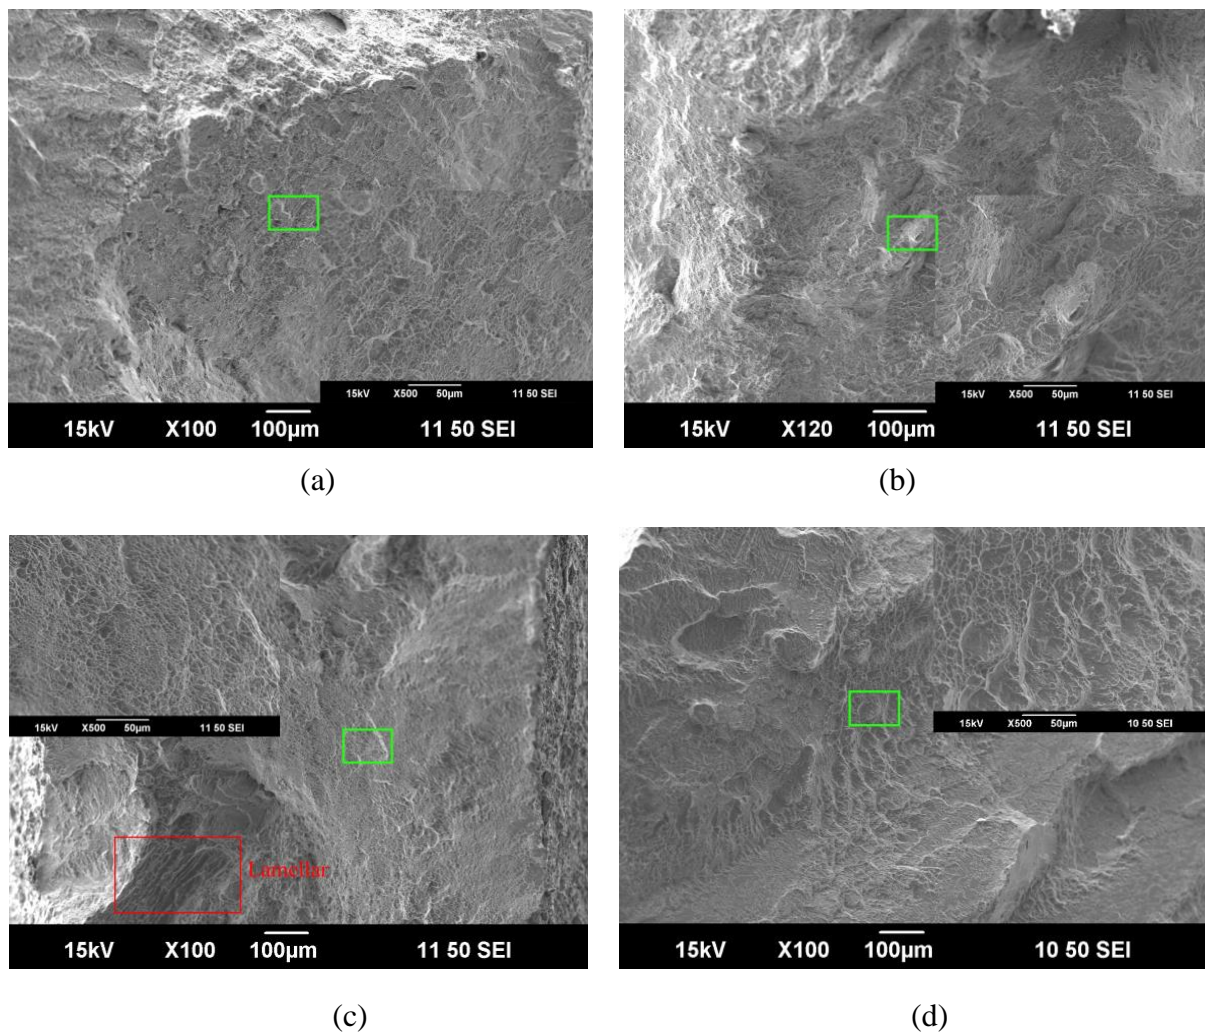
High-magnification fractographs of tensile samples: (a) 100°C; (b) 200°C; (c) 300°C; (d) Interpass CO₂ gas cooling
